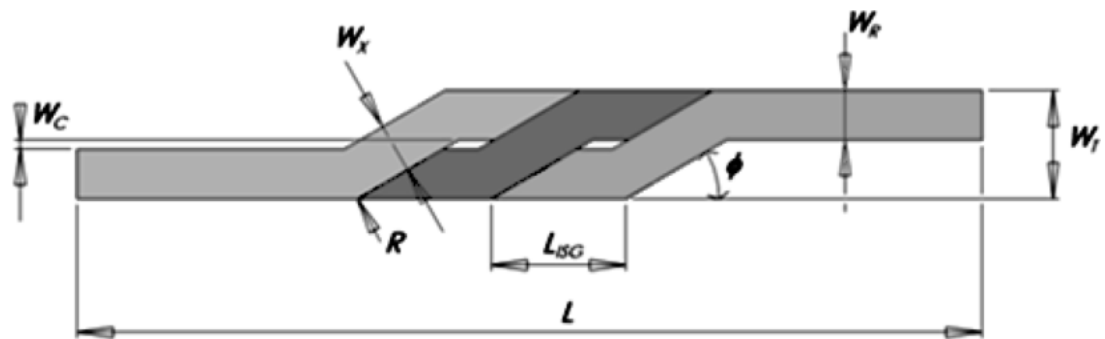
Diagram of a partially assembled Roebel cable taken from Ref. [BD09]
